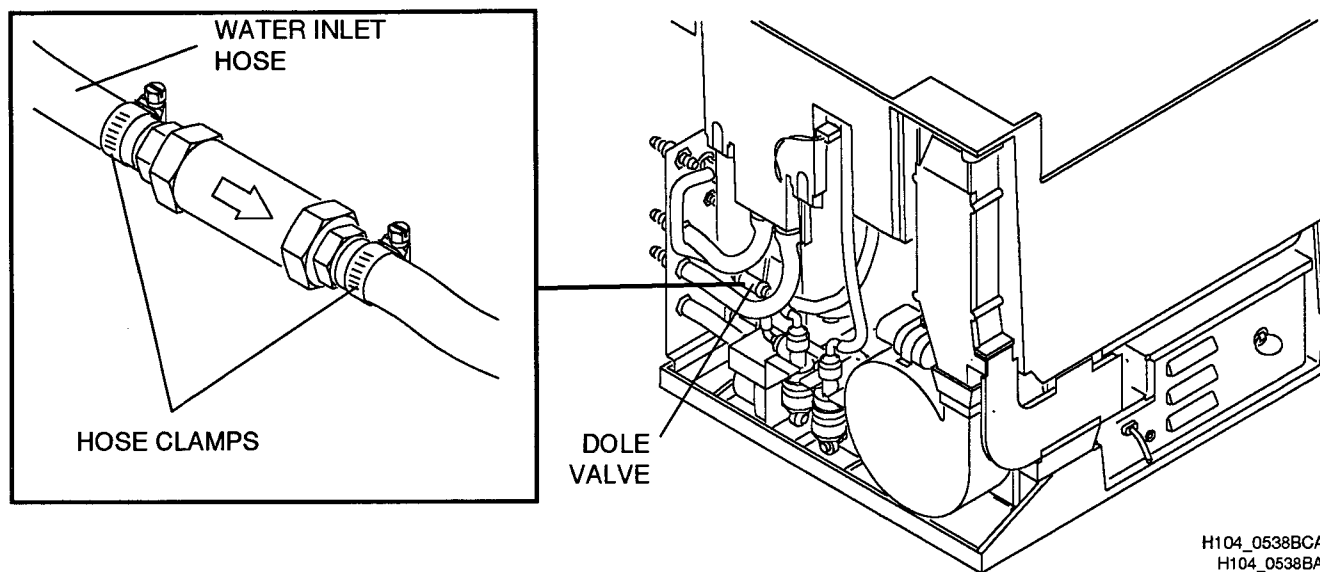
Identifying Parts on the 270 RA PROCESSOR or MULTILOADER 300
